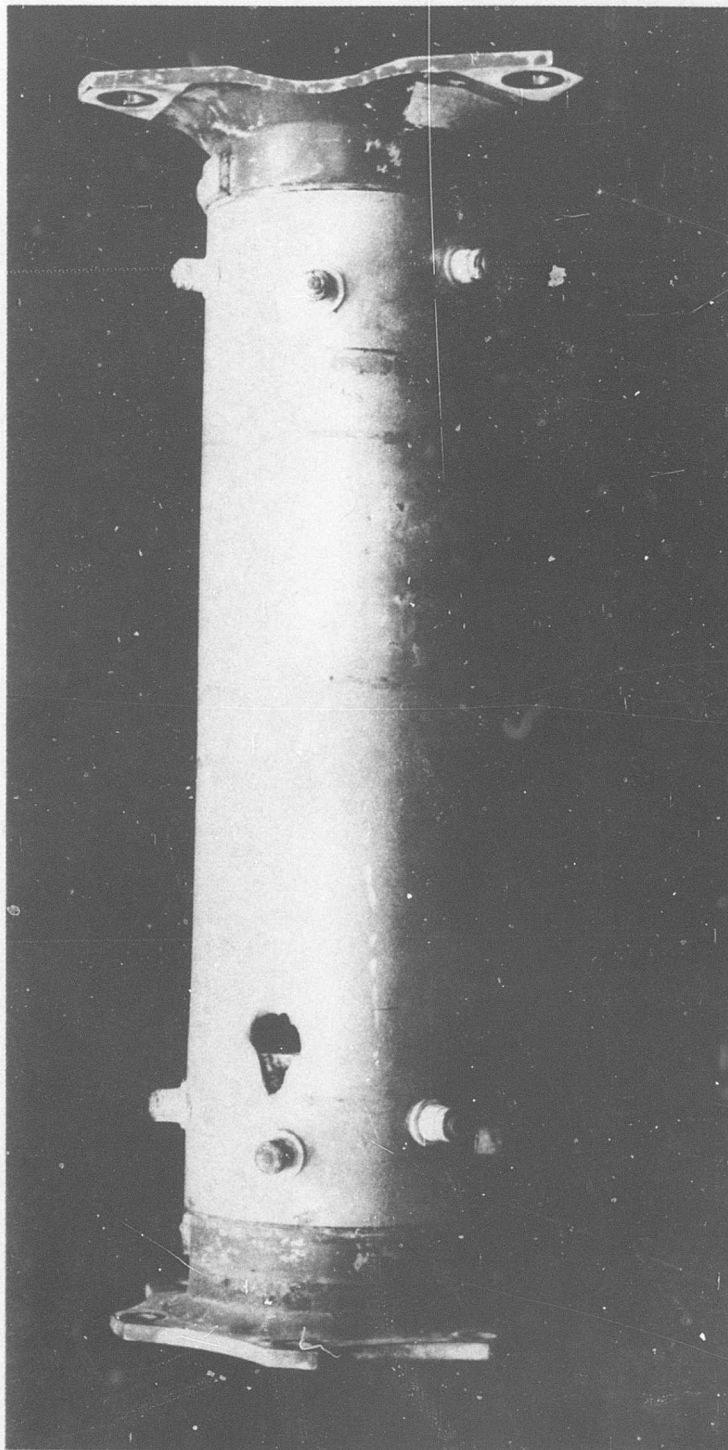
Aluminum Specimen 10, Entrance Hole Damage.
